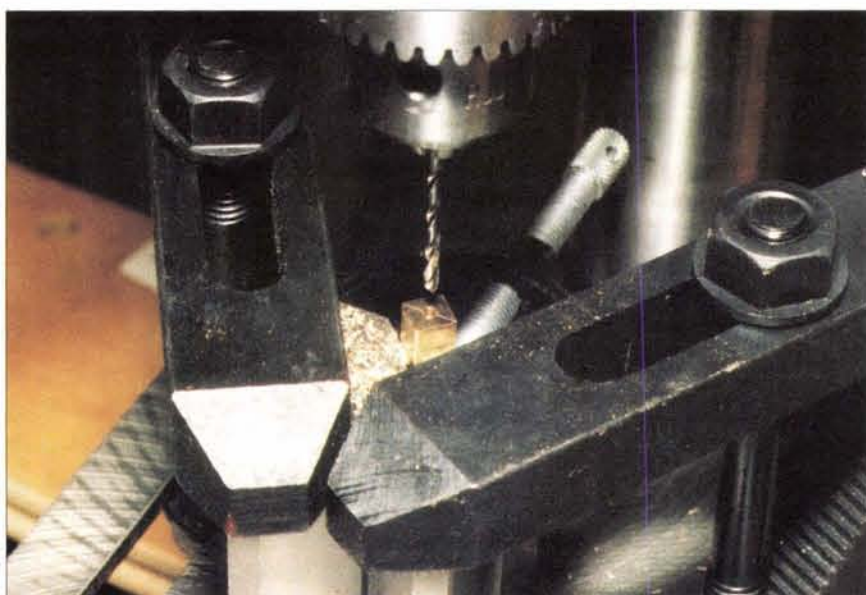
V-block clamped to drill press table for drilling the follower nut.
